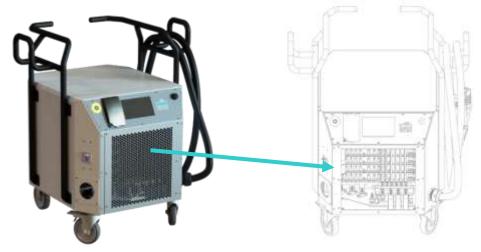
Opening Front Panel by removing screws around panel's perimeter
